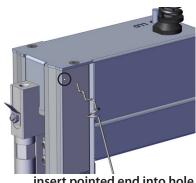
Probe Guide Insert Installation (FC Valve Retainer Bracket)
